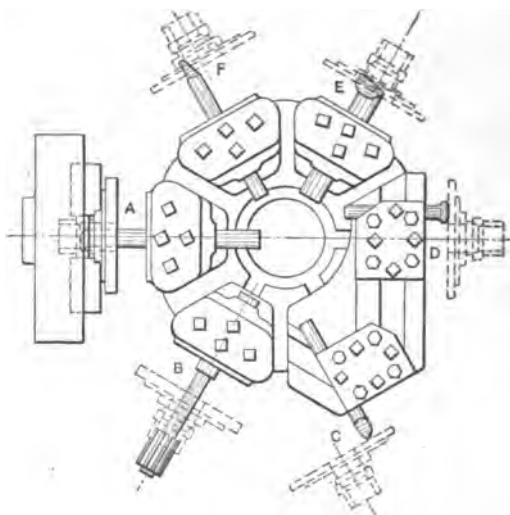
Layout of Tools on the Flat Turret Lathe for the Operation shown in Fig. 35
